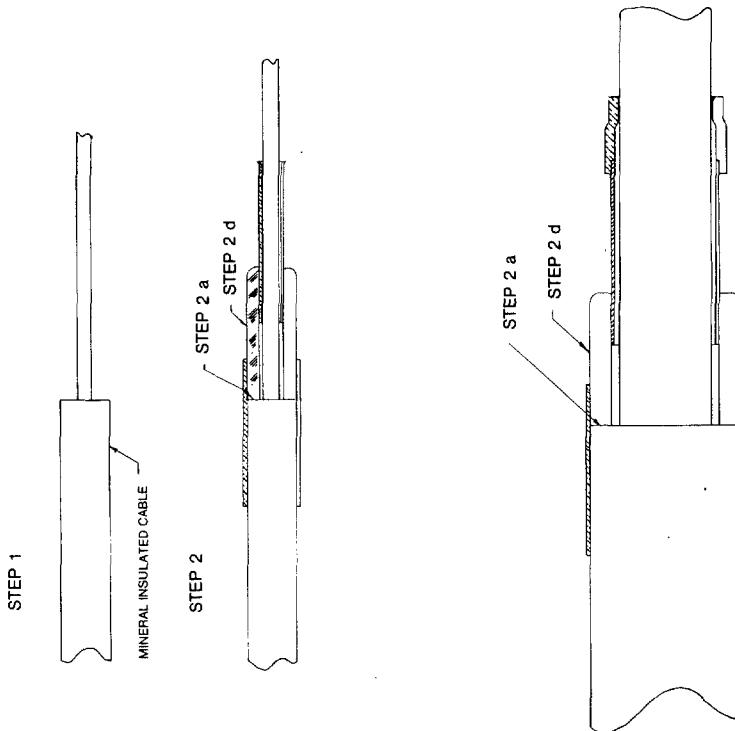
A16. Cable end sealing of mineral insulated cables.
